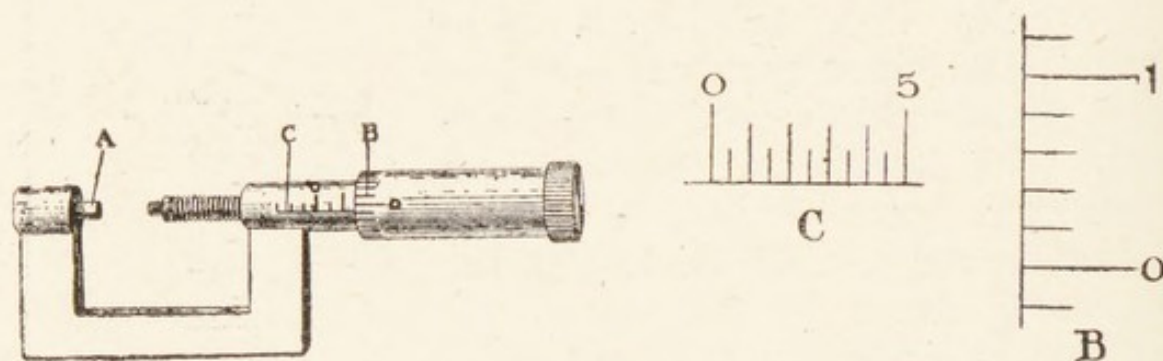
Micrometer screw gauge, with enlargement of B and c.
